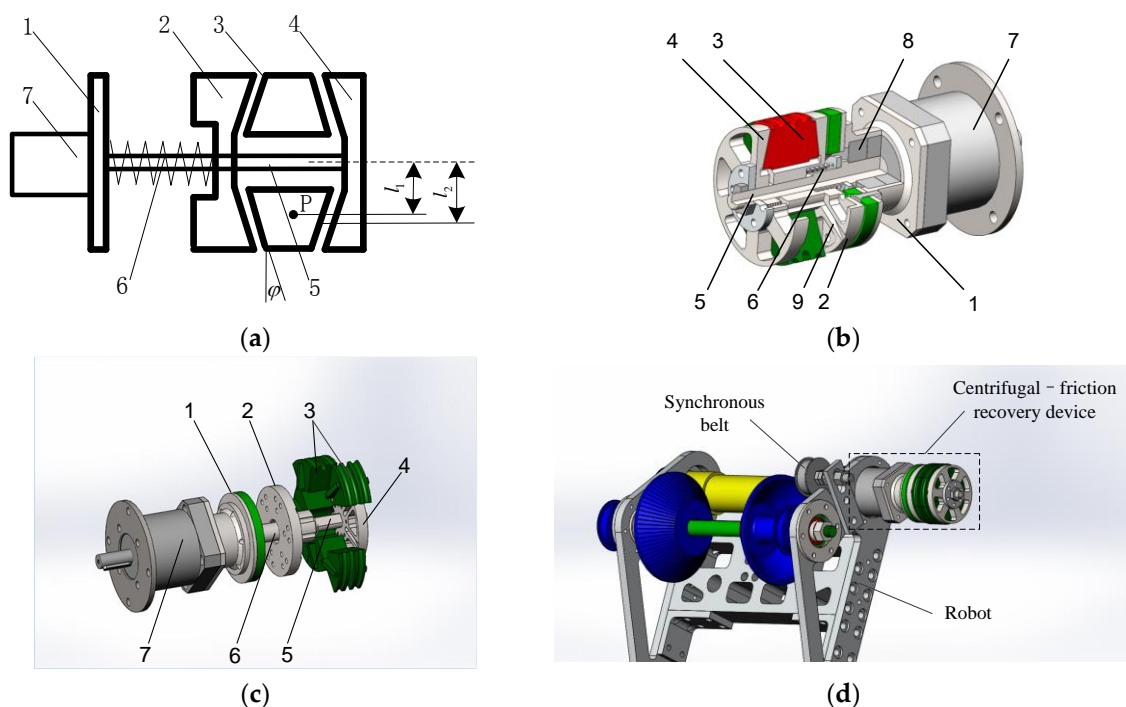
Safety recovery structure of the robot. 1—Main case; 2—Brake disc; 3—Mass blocks; 4—Base; 5—Rotary shaft; 6—Spring mechanism; 7—Gearbox; 8—Ball bearing; 9—slideway. (a) Schematic diagram of recovery mechanism; (b) The inner structure of the recovery device; (c) Breakdown drawing of recovery mechanism; (d) Centrifugal–friction recovery mechanism.
